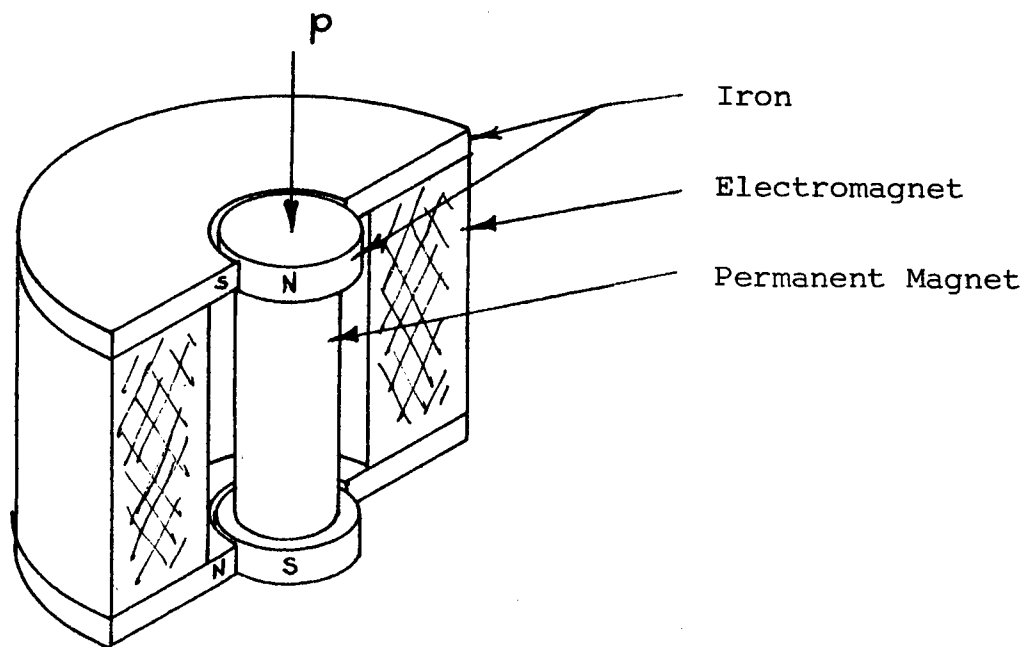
ELECTROMAGNET THRUST BEARING - ATTRACTIVE
